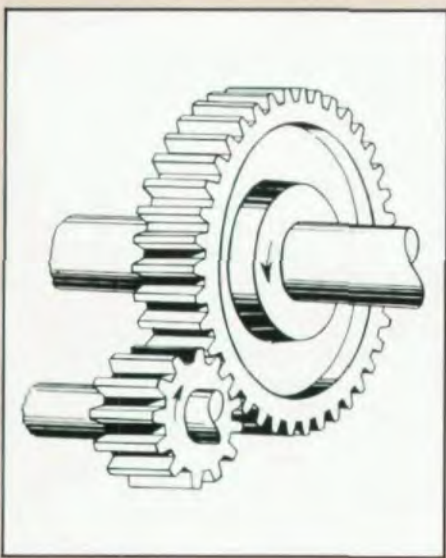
Spur gears. The teeth of these gears are developed from blank cylinders. (Courtesy Mobil Oil Corporation.)
